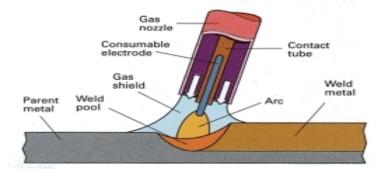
Schematic diagram of gas metal arc welding (GMAW)
